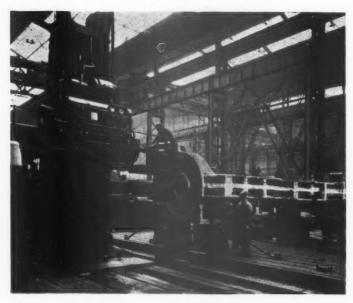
A 62 tons roll housing on one of the horizontal boring, milling and drilling machines in the heavy machining section of the Darnall Works. This machine has an 8\{\xi\$" dia. spindle; the spindle extension is approximately 5' 10". It has two concentric spindles, the inner one being a high-speed spindle for drilling. The horizontai traverse of the column along the bed is approximately 29' 6" and the vertical traverse of the slide on the column is approximately 14' 9", enabling large jobs to be milled or bored at one setting.
